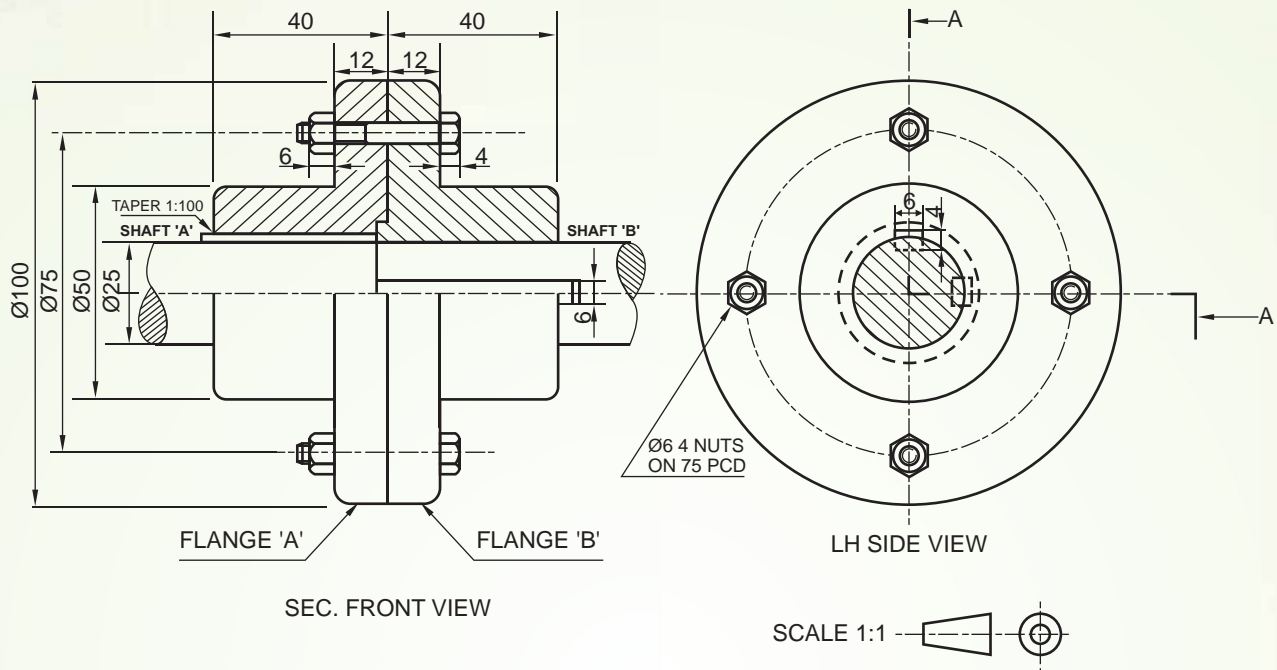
DETAILS OF AN UNPROTECTED FLANGE COUPLING
